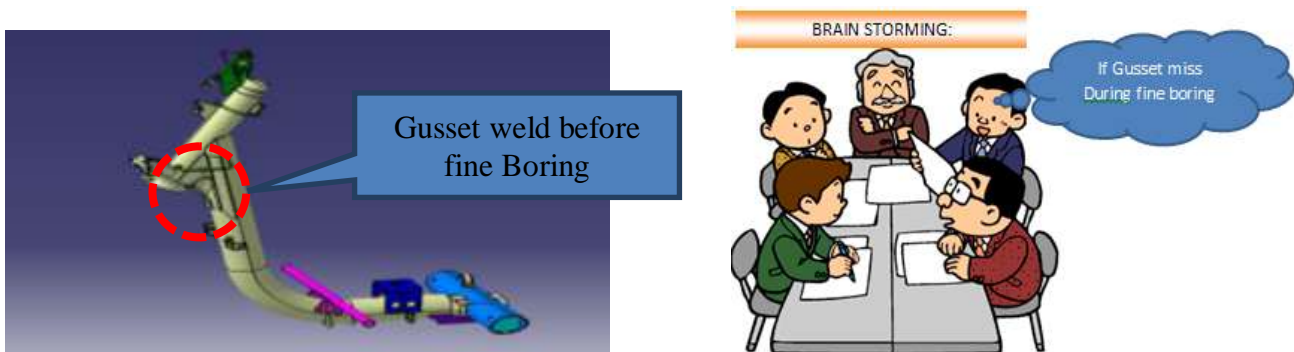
Gusset weld before fine boring to prevent ovelty occurs during fine boring and Brainstorming.
